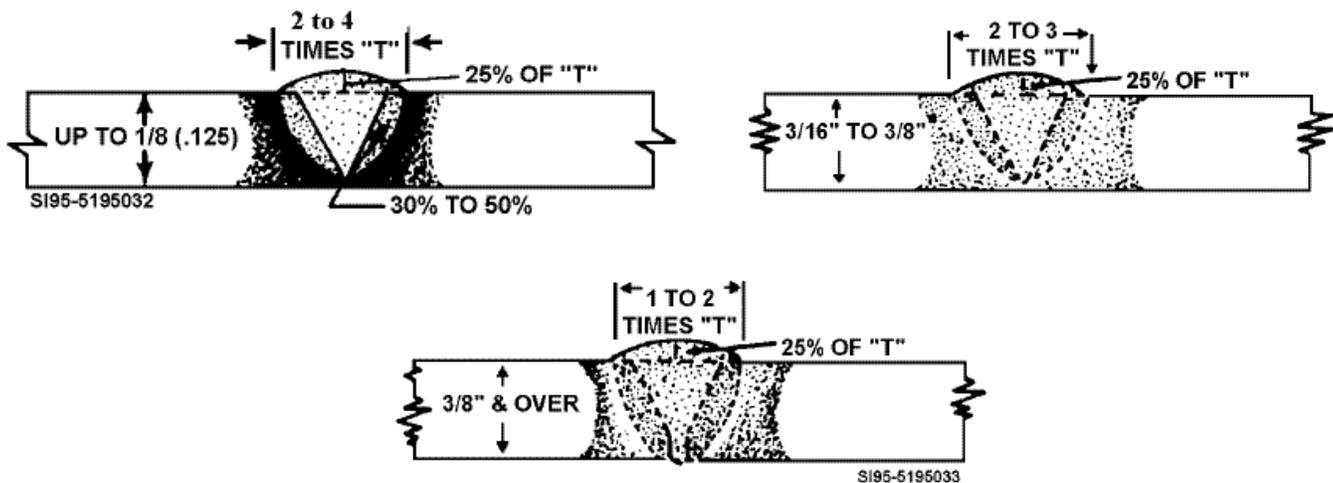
Welding Specifications on Flat Weld Butt Joints.
